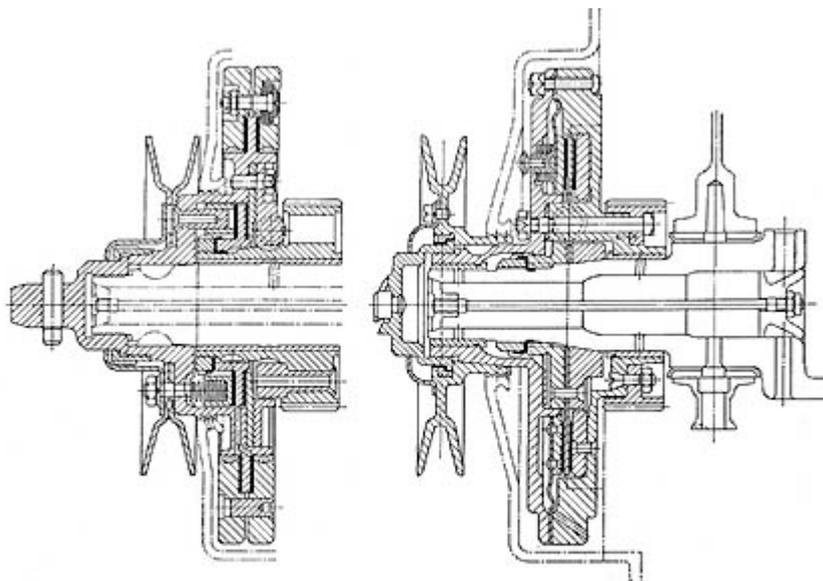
Crankshaft dampers: Left—standard, right—low inertia
